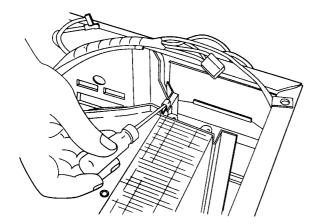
Clip Securing Cab Blend-Door Assembly to Evaporator
